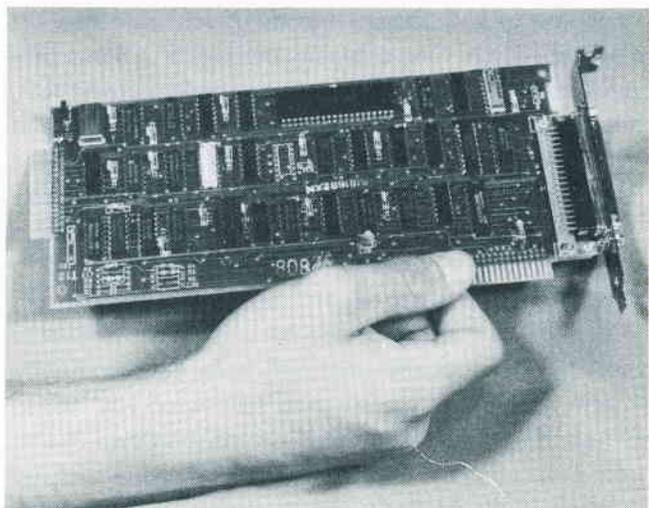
Handling a printed-circuit board the WRONG way can cause corrosion.
